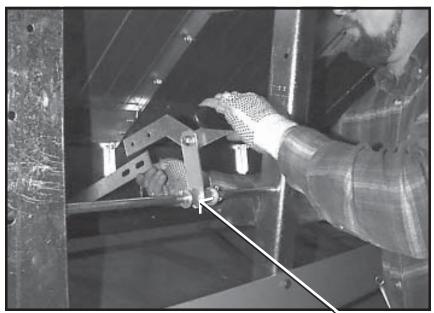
Installing linkage bar to clean-out door handle. Note weld on pivot rod weldment is installed facing rear of dryer.
